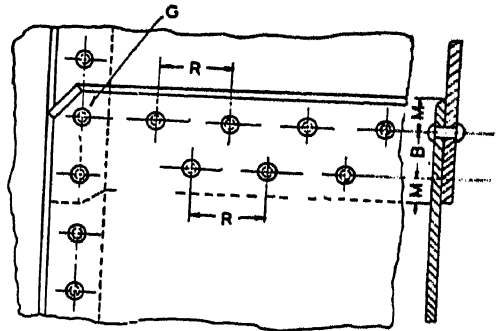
Double-riveted Lap Joint—Longitudinal.
